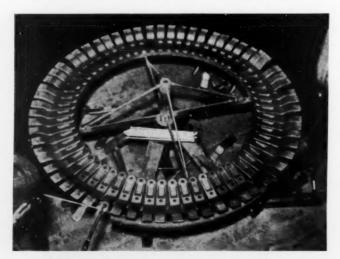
Trenching machine teeth are readily weldable steel, hard-faced with tungsten carbide tube rod
